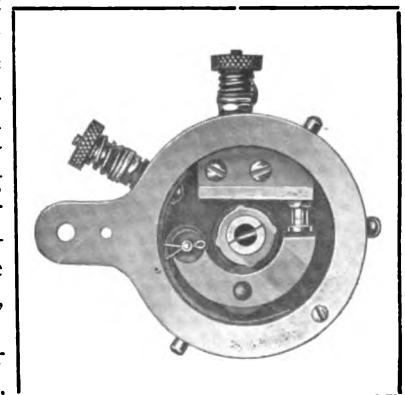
Dust Cover Removed from Igniter to Show Interrupter and Cam.
